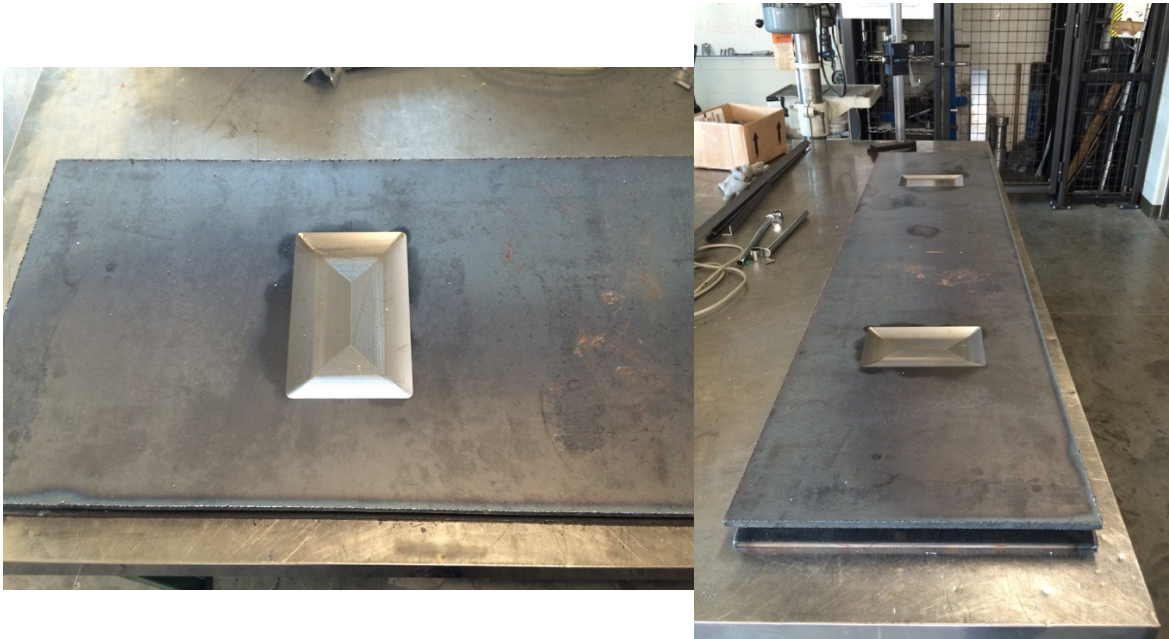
Images of machined flaws in plate prior to rolling and welding.
